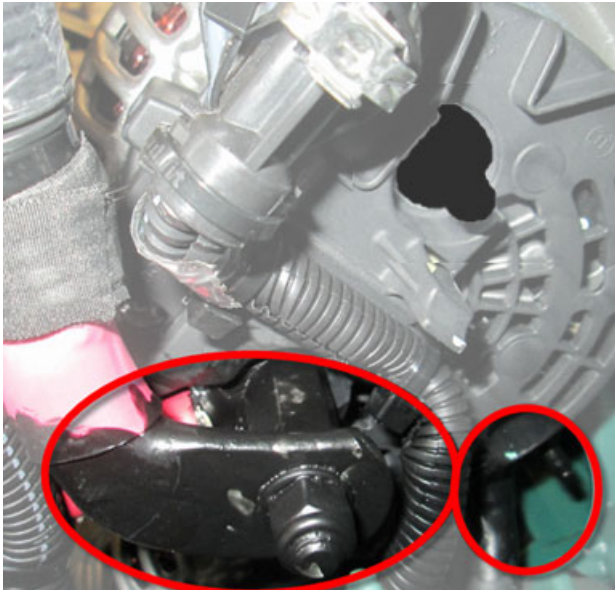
Upper R.H. side Bosch alternator power cable lug protected with Color Guard rubber coating.
